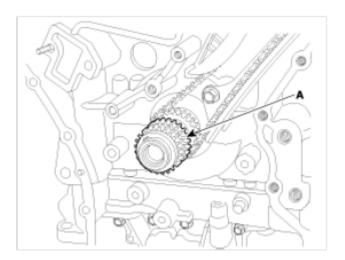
Identifying Tensioner And Idler Courtesy of HYUNDAI MOTOR CO.
